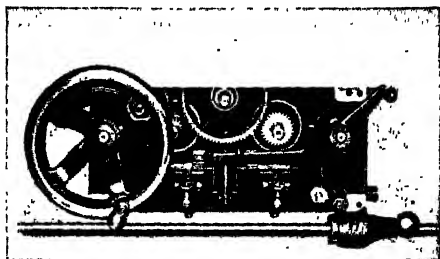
A.—View of a Lathe Apron with Front Plate Removed showing Feed Mechanism.
